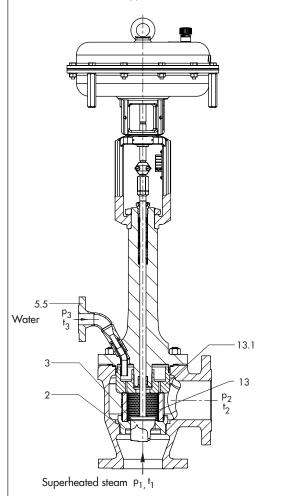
Type 3286-7 Pneumatic Steam Converter with insulating section, welding ends and Type 3277 Actuator
